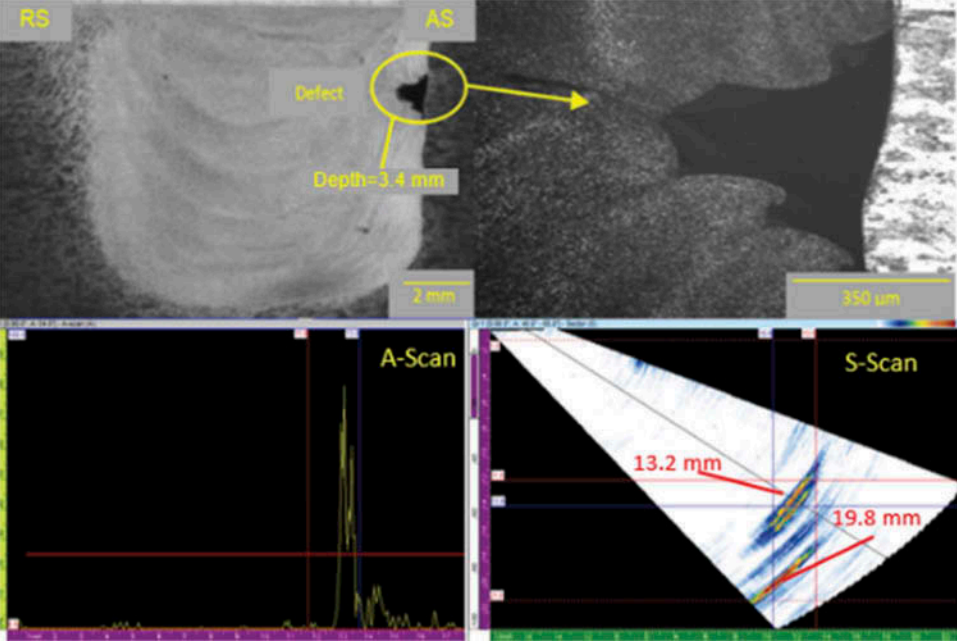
Optical image of cross-section, enlarged defect image, PAUT A-scan, and S-scan image (second leg) of an FS-welded panel with surface cavity (observed by second leg).
